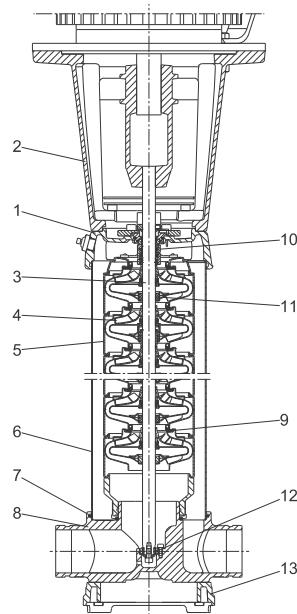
Sectional drawing of CRN 32, 45, 64 SF
